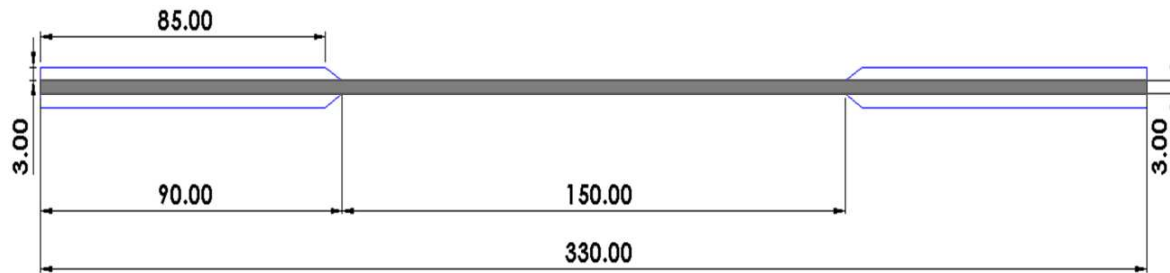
Dimensions of GFRP fatigue test coupons in mm.
